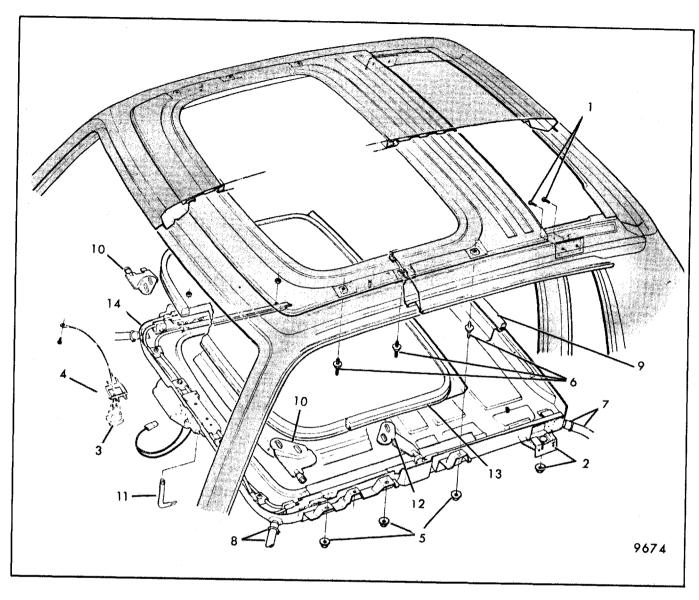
Sun Roof Assembly Complete (Exploded)
